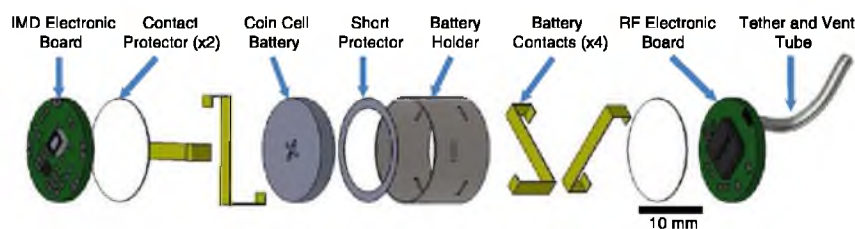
Assembly drawing of electronic package. The battery is held in place by the four battery contacts. The contact protector at each end prevents the battery contacts from interfering with the IMD and RF
